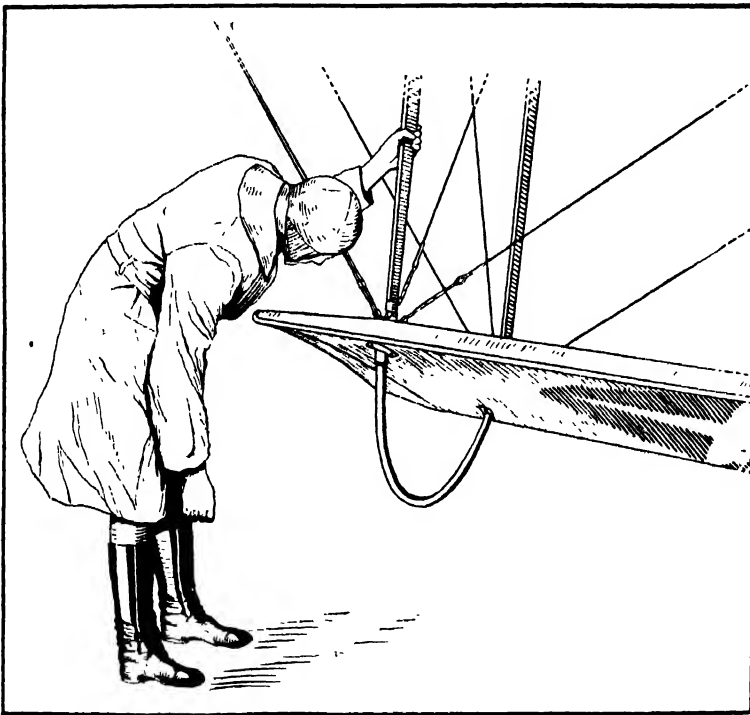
Examining Wing Fitting and Landing and Flying Wires.
